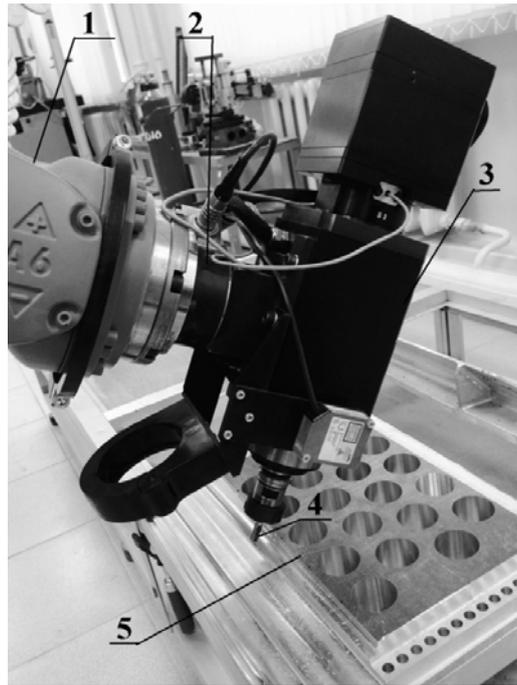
Location scheme of nodes: 1 - robot "Kuka", 2 - force-torque sensor "Kuka.ForceTorqueControl 3.0", 3 - electric spindle "Colombo RC90", 4 - cylindrical burr, 5 - workpiece
